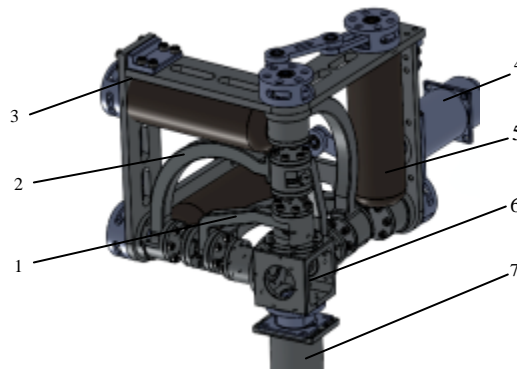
Prototype of shoulder joint, 1: Connecting rod, 2: Frame link, 3: Frame, 4: Trunk connector, 5: Actuator, 6: Moving platform, 7: Big arm
